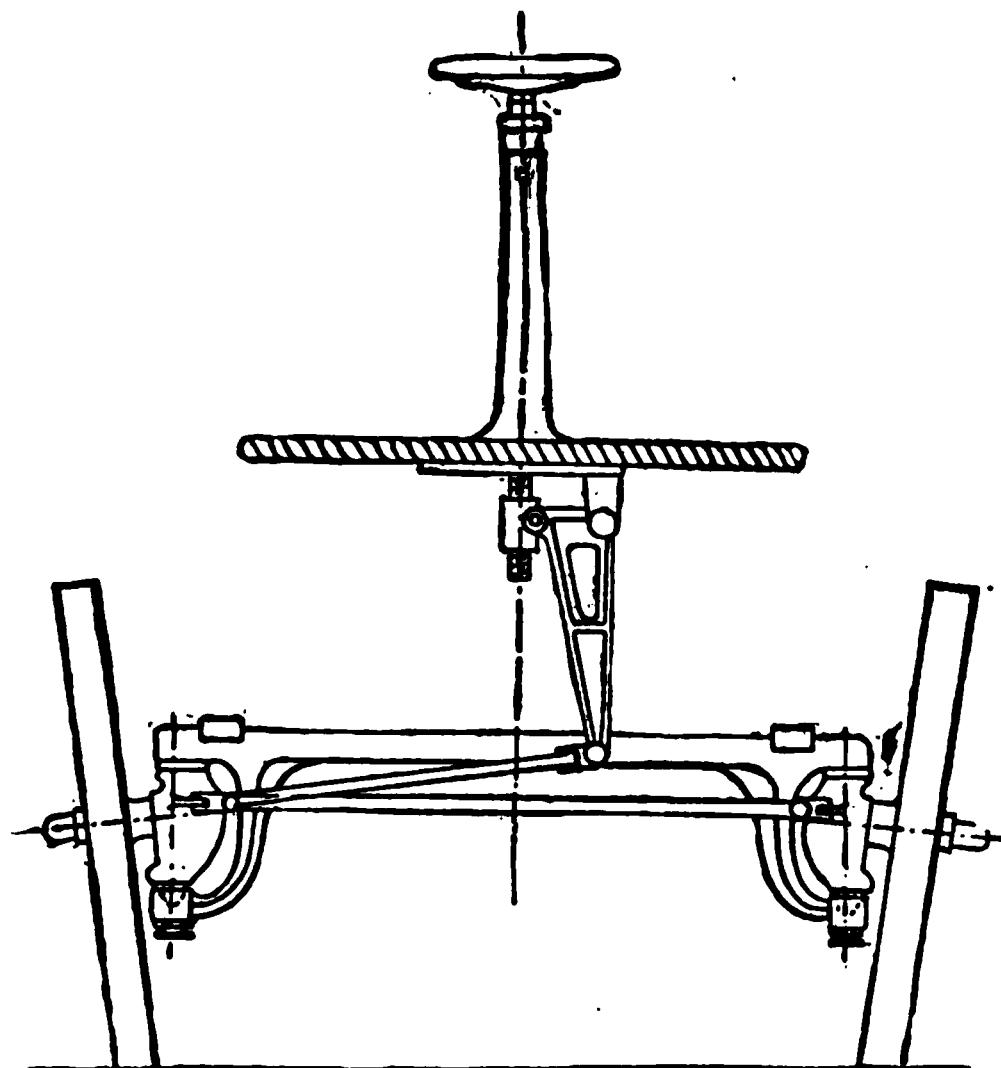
Steering Arrangement of the Clarkson-Capel Steam Wagon. The spindle of the steering wheel carries a screw at its end, which works a boss, as the wheel is turned, thus actuating the lever and drag-link attached to the arm of one of the axle pivots.
